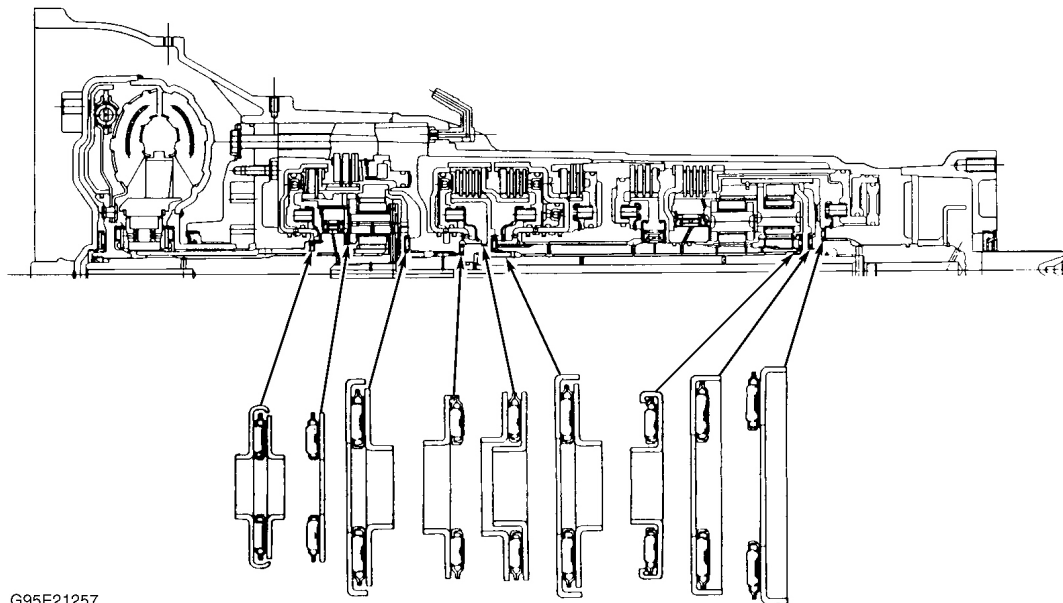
Identifying Bearing Race & Thrust Bearing Locations
